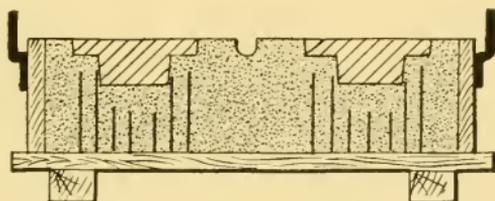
Shows drag of face plate mold after cope has been lifted off.
